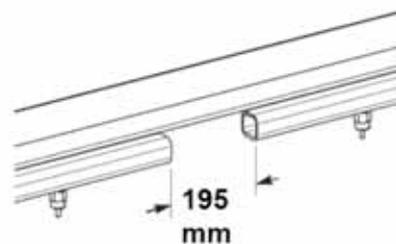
Cut-out piece of pipe for slope pressure-regulator
